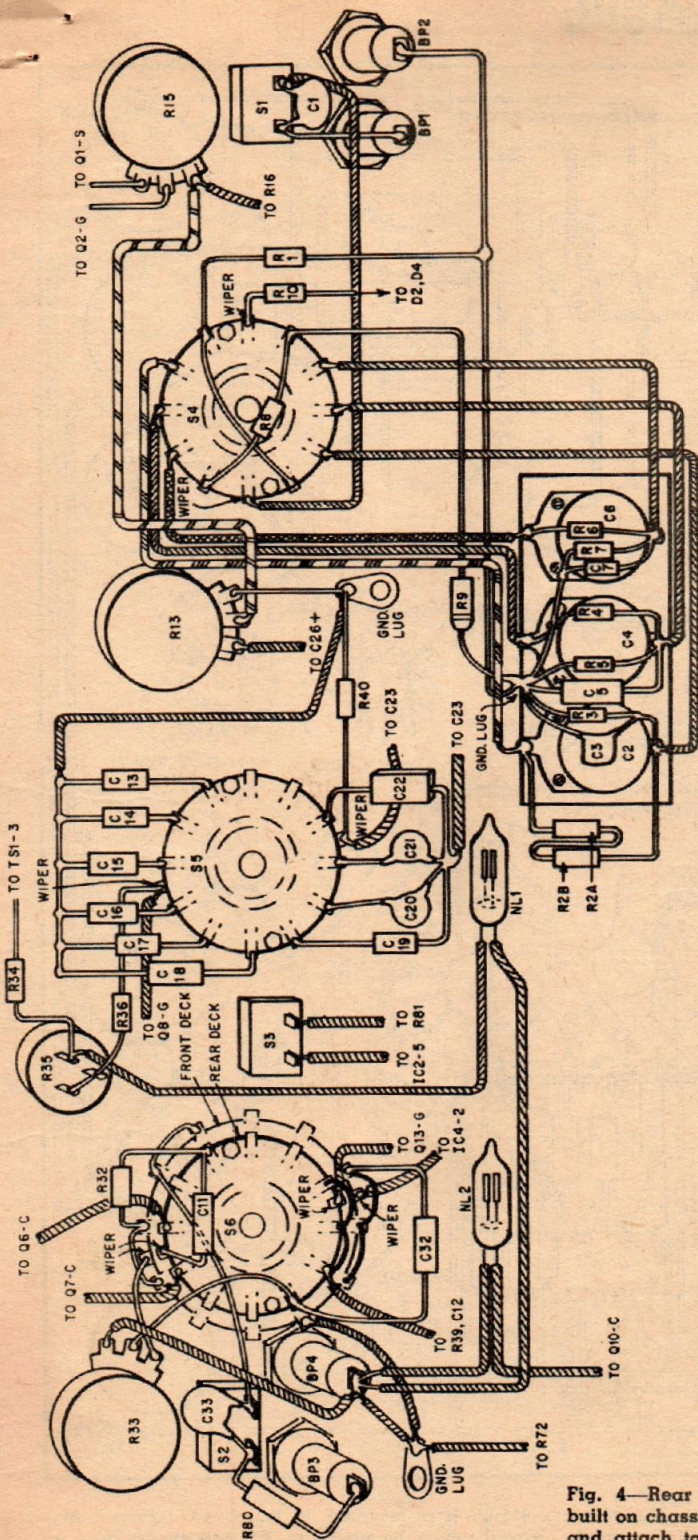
Rear of front panel. Because 'scope is built on chassis bottom plate, make 2 x 9-in. panel and attach to bottom plate with angle brackets.
